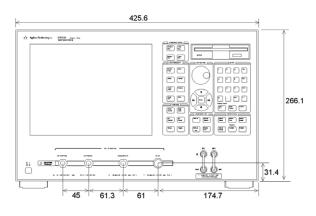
Dimensions (front view, in millimeters, nominal)
